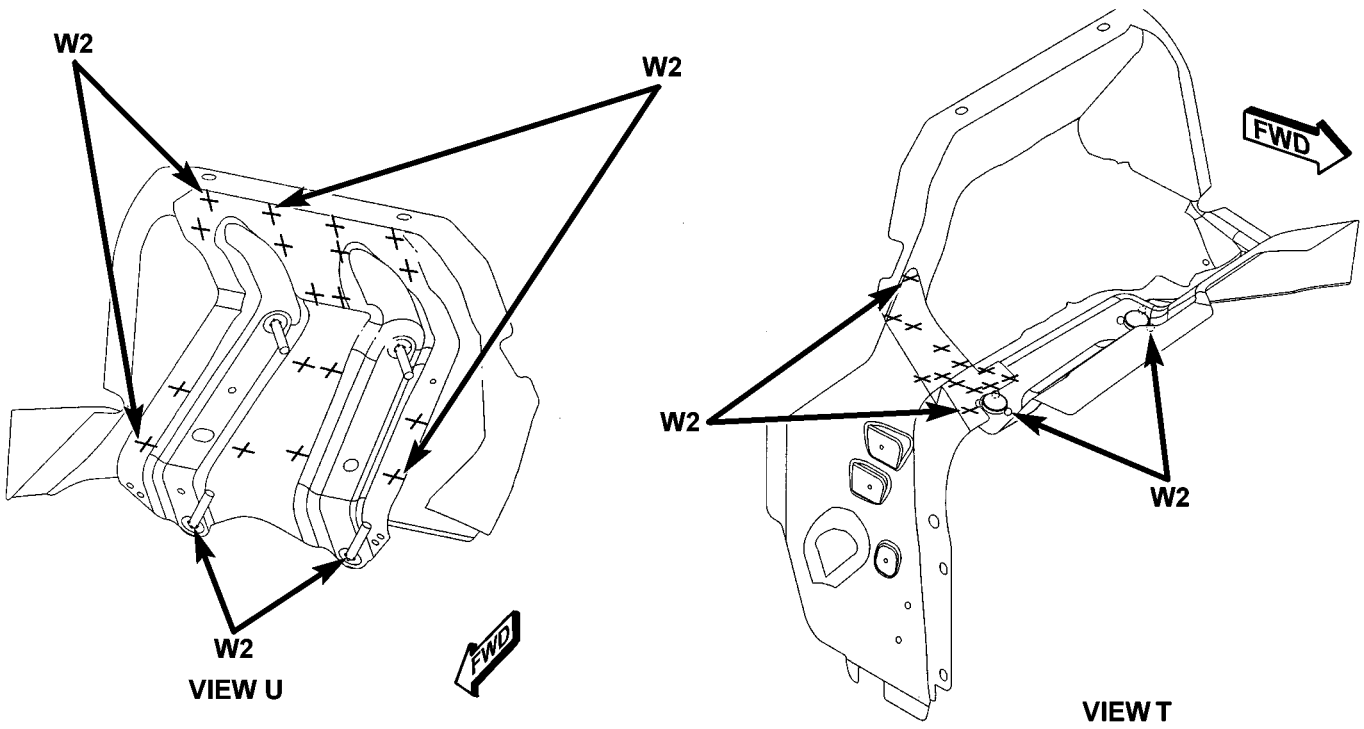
COWL ASSEMBLY - RIGHT HAND DRIVE (2 OF 3)
